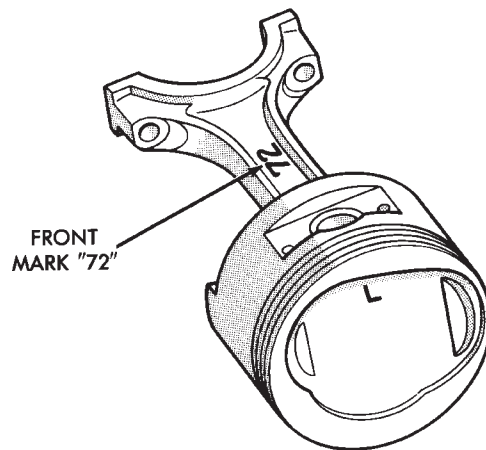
Identify Piston and Rod Assembly for Cylinder Installation
